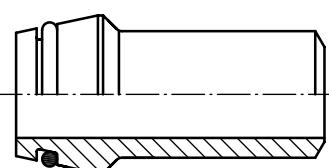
Weld-on nipple with O-ring (WDNP)
